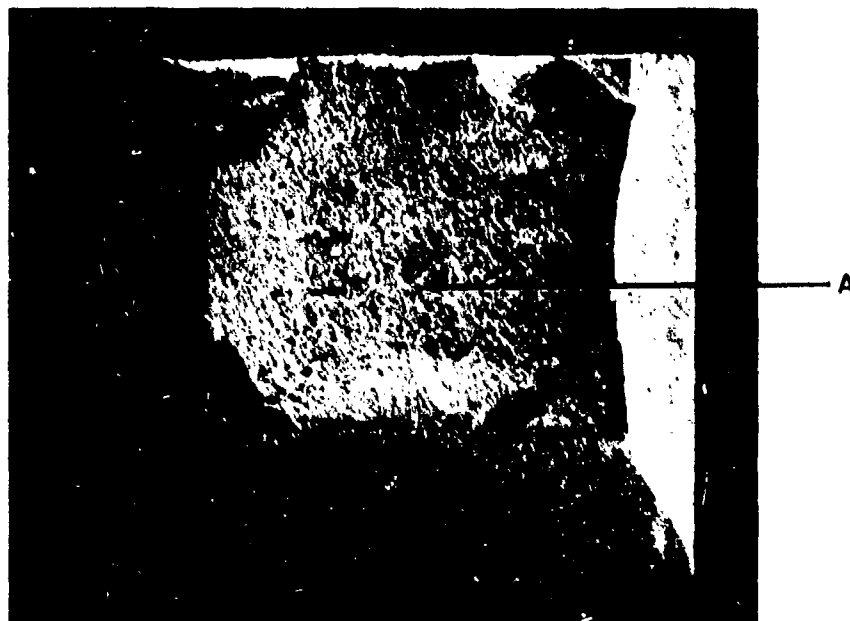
Tensile fracture surface of a temper-embrittled A-514 weld specimen, 15x.
